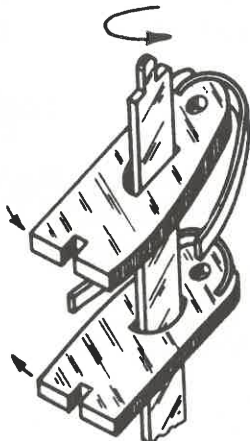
File Cuts on Opposite Side of Blank to Conform to Tumbler Movement
